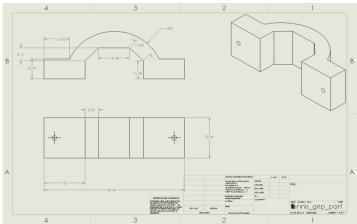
SolidWorks drawing depicts the dimensions of the half-clamps that were fabricated.
